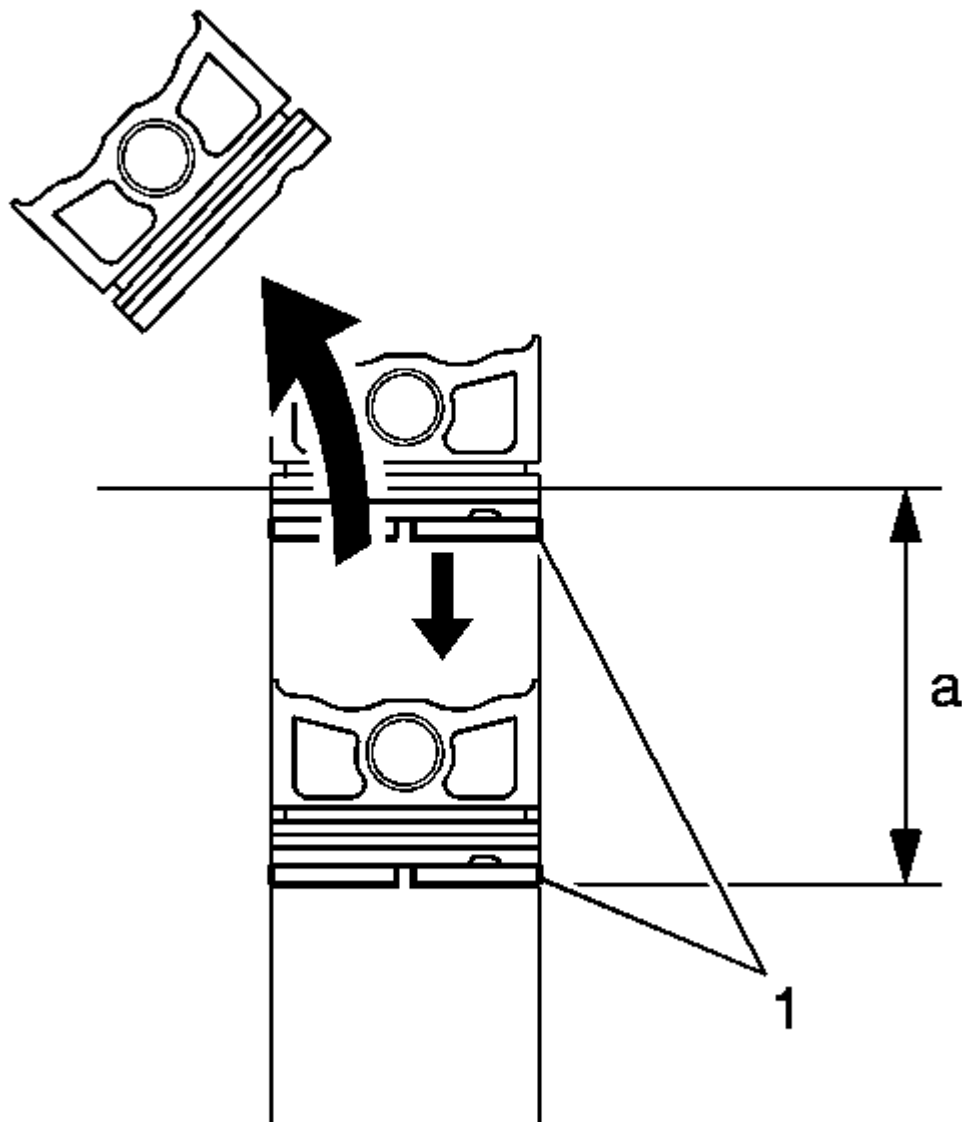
Pushing Piston Ring Into Cylinder Bore
